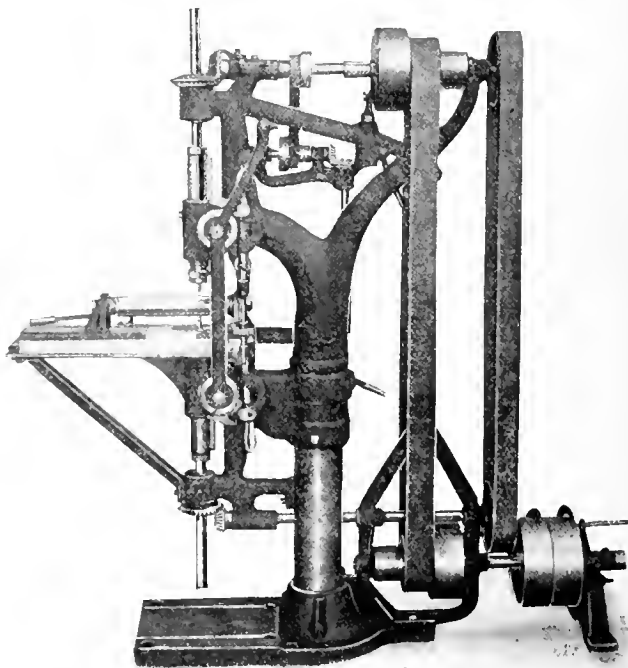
Right Side of the Routing Machine, showing Feeding Motion for Mill Spindles.
